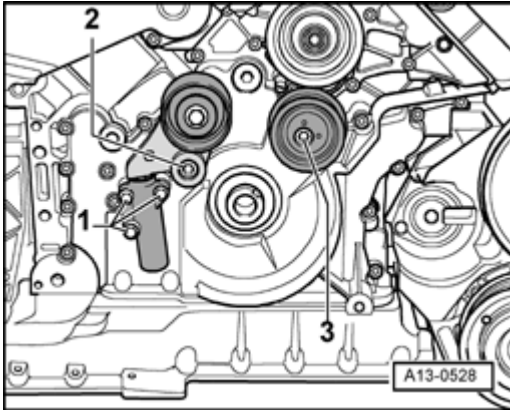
Removing Eccentric Roller & Tensioning Lever With Tensioning Roller And Tensioner
